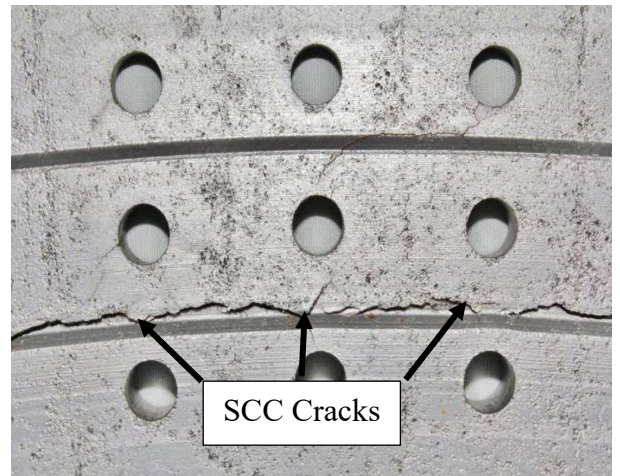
Photo of L-1 Rotor Disk Finger Dovetail Joint Showing Cracks
